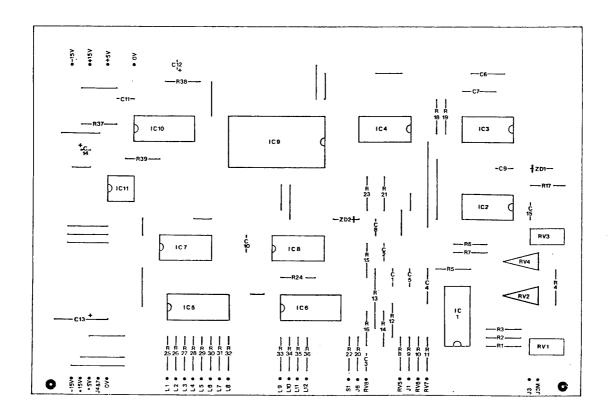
80-21 PCB COMPONENT LAY-OUT
